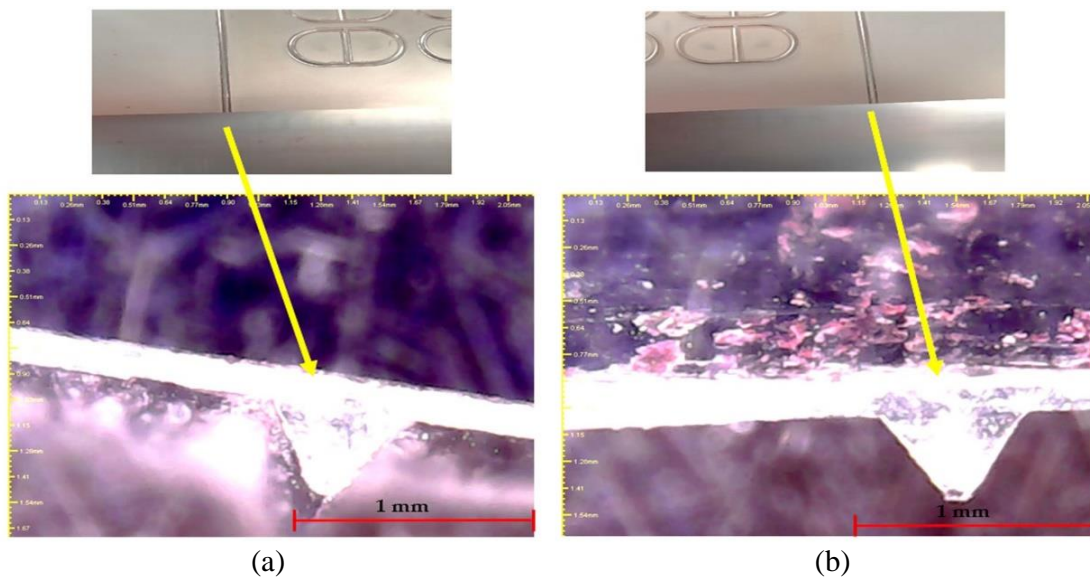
M4 die-cut: (a) left side knife wear and (b) right side knife wear.
